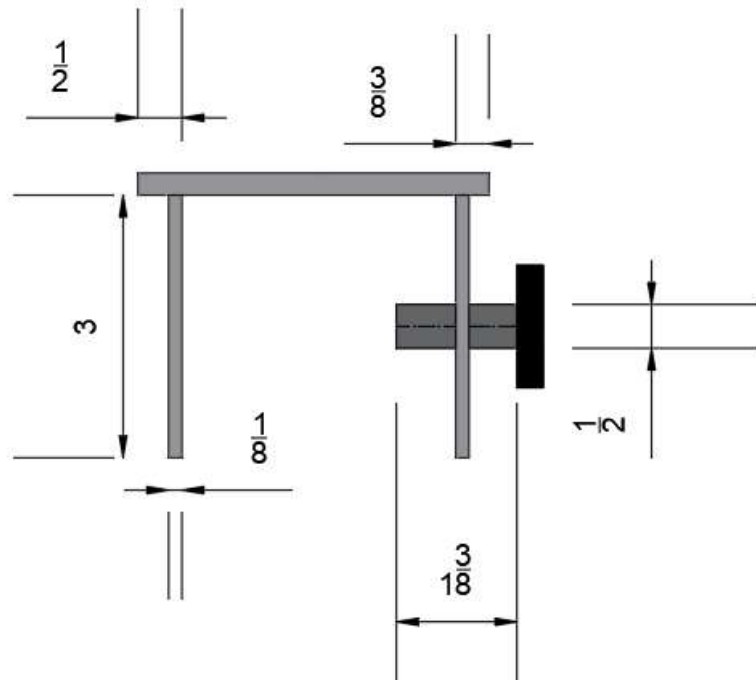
Front-View Schematic of Jig Design Including Dimensions
